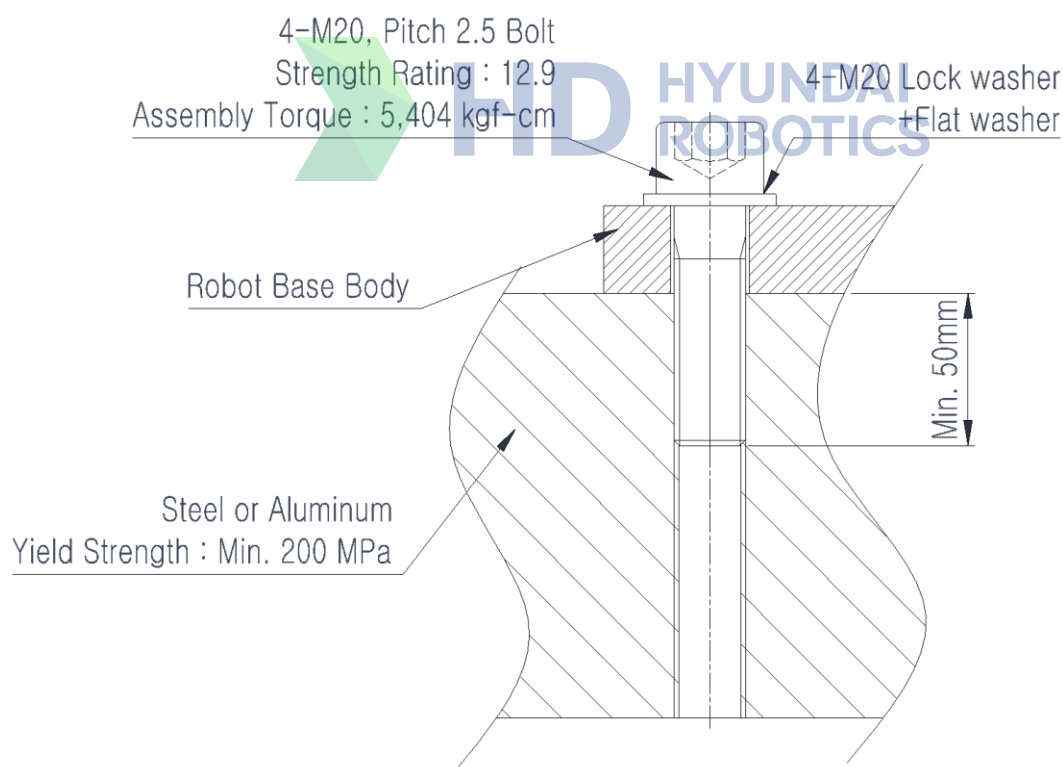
Section of Robot Installation(Floor, Wall, Ceiling)
